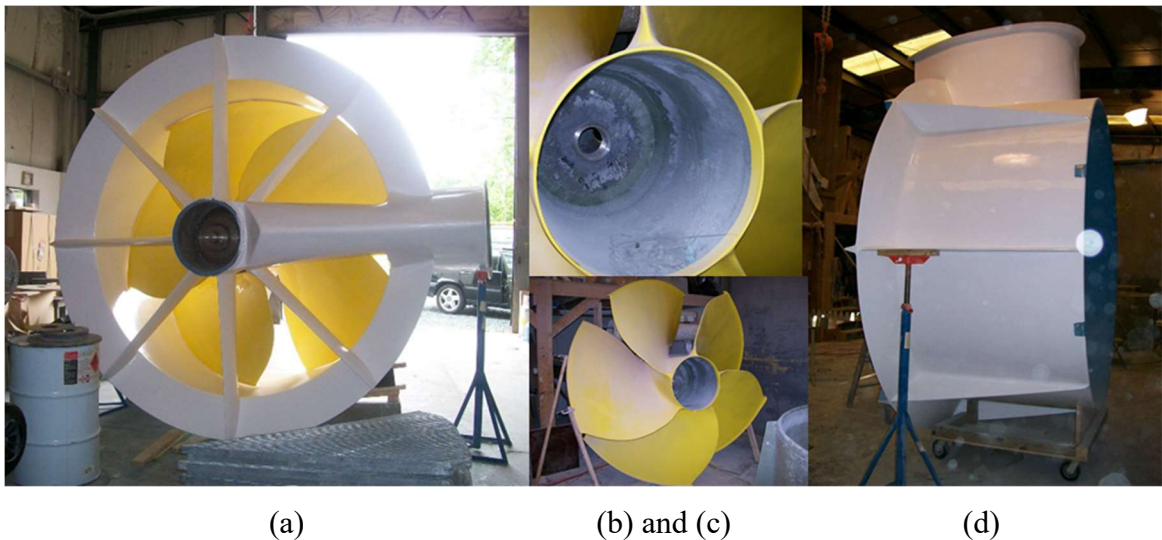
(a) Rotor and shroud assembled in manufacturer's shop, (b) threaded hub for emergency release of generator shaft if rotor is blocked, (c) complete rotor, and (d) shroud with housing at top for vertical drive chain transmission and generator (photos taken with permission).
